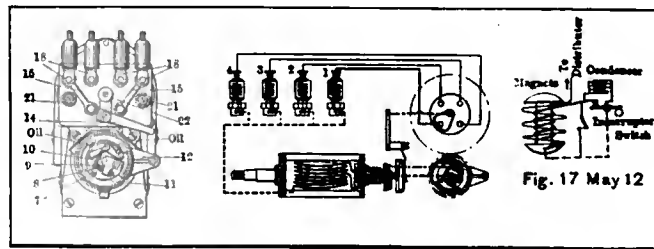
End view of Bosch magneto containing spark-advancing mechanism. Fig. 5—Showing arrangement of details of same magneto. Fig. 5a—Wiring diagram of self-contained high-tension magneto
